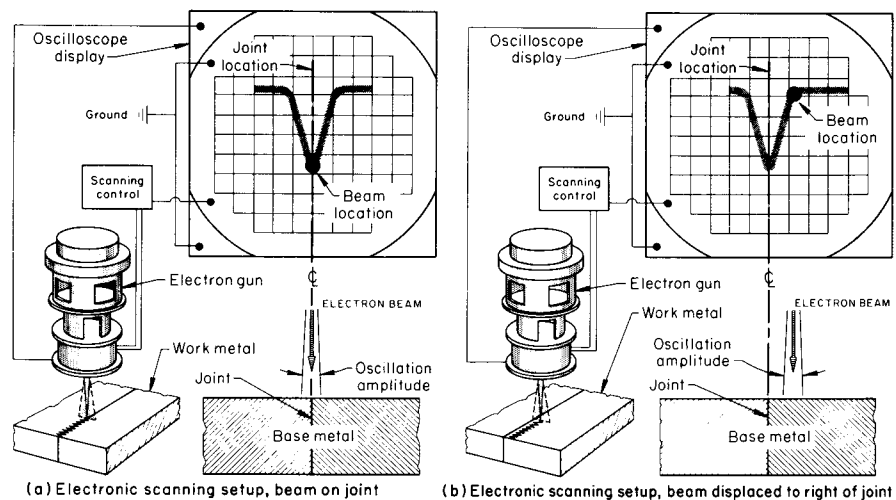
Electronic scanning apparatus with cathode ray tube display to show alignment of electron beam relative to weld before welding operation is carried out. (a) Electron beam centered along length of joint. (b) Electron beam displaced from centerline of joint
